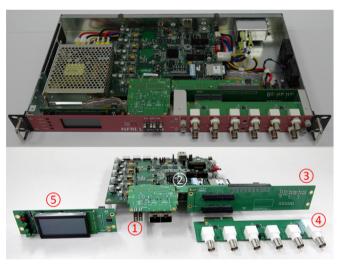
Assembled component with ZC702 Evaluation Kit.
